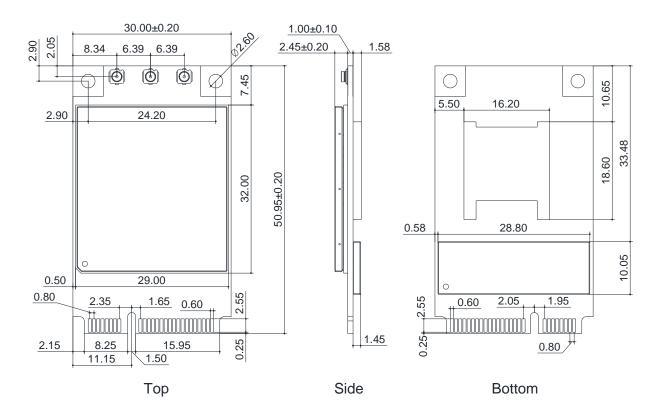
Mechanical Dimensions of EG25-G Mini PCle
